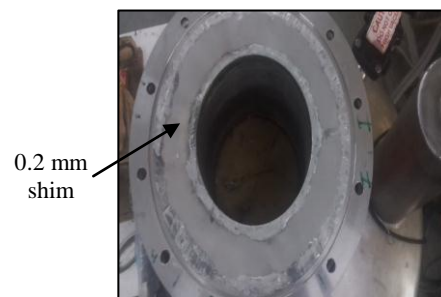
Photograph of 0.2 mm thick SS-304 shim soldered in sock assembly.
